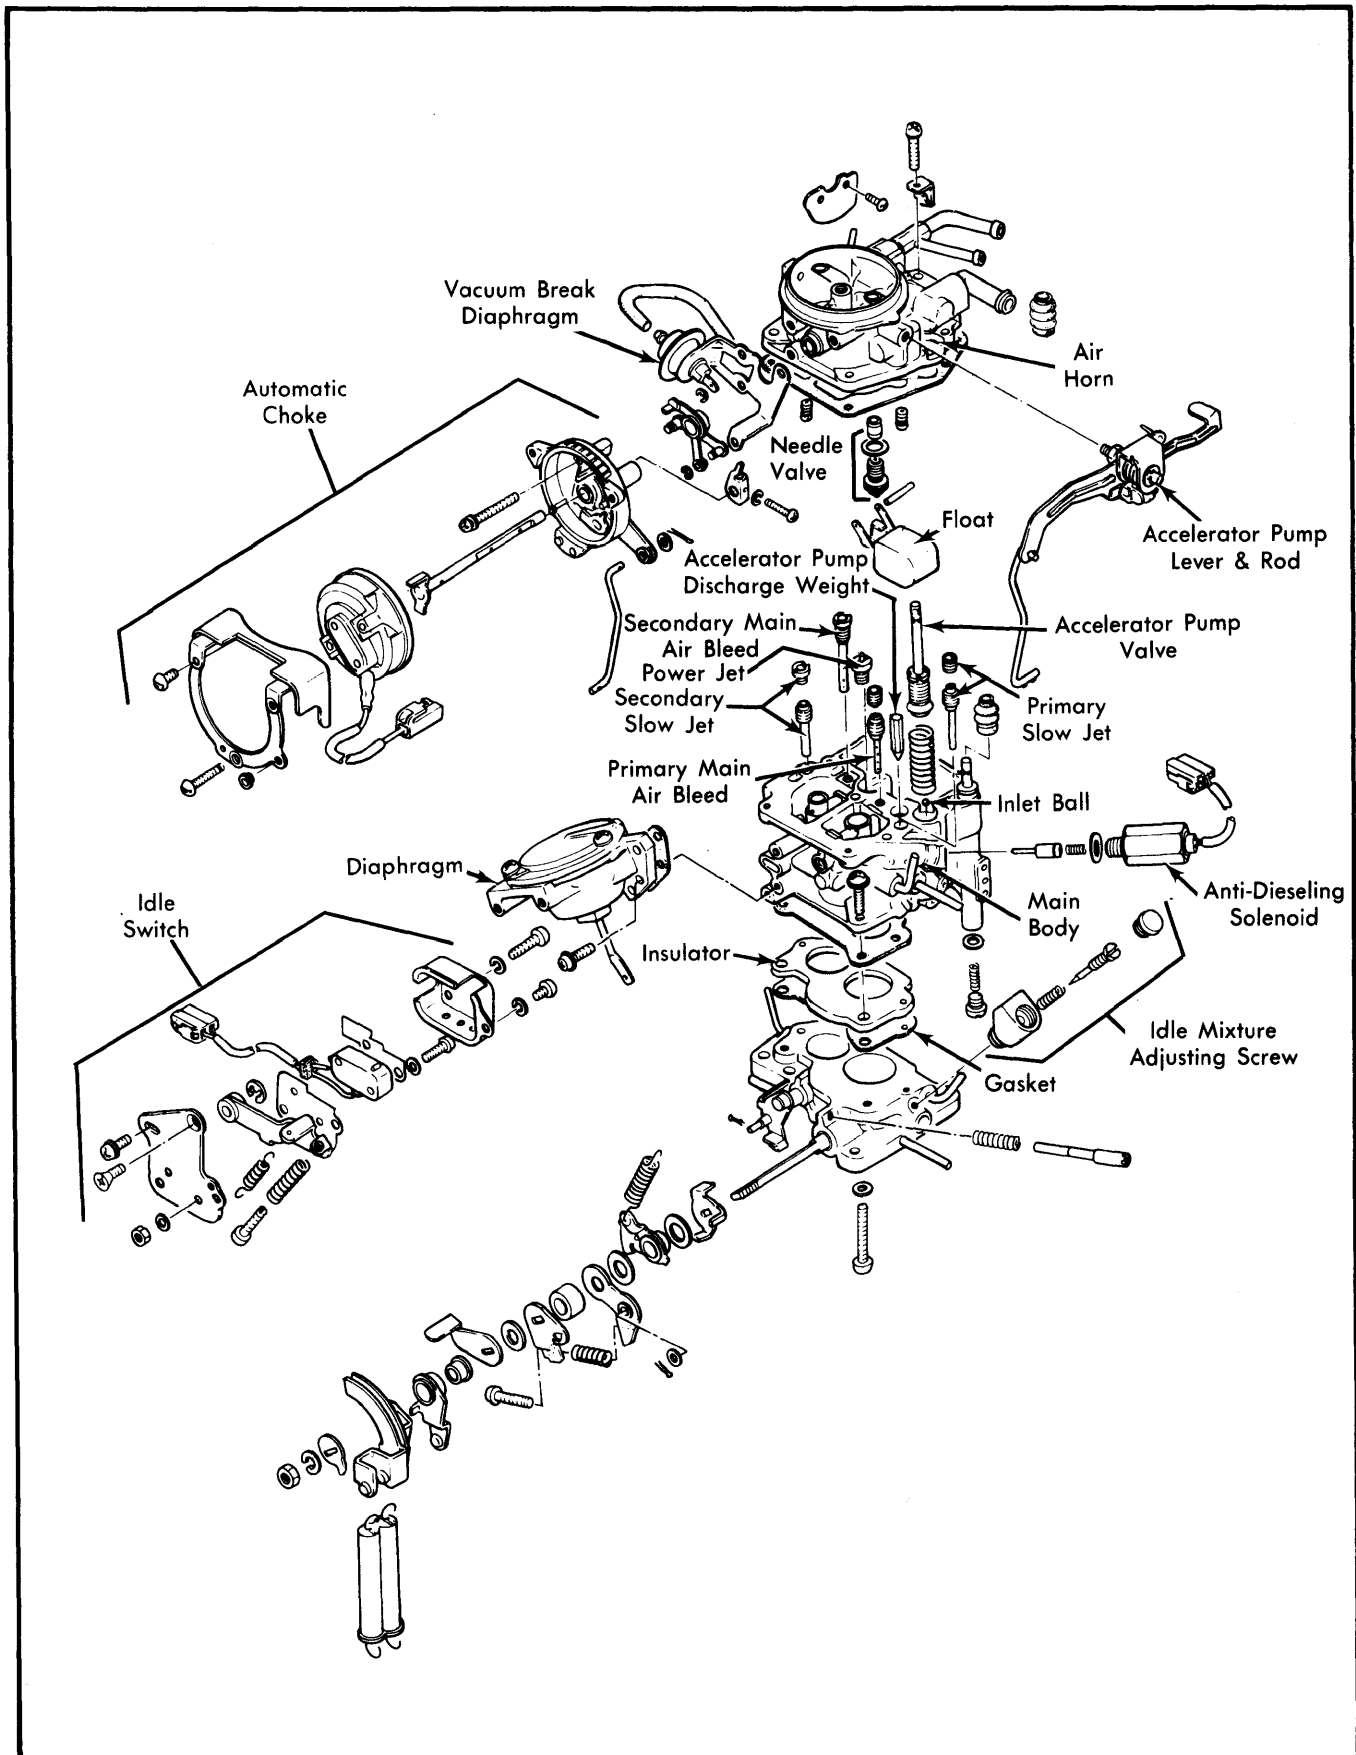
Exploded View of Mazda GLC Hitachi Carburetor
